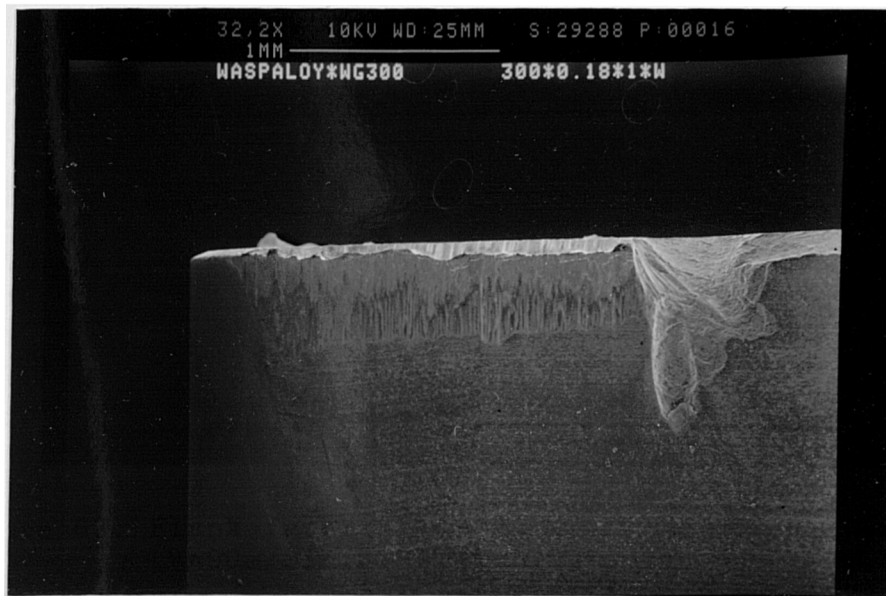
Flank face of WG-300 used to machine Waspaloy
